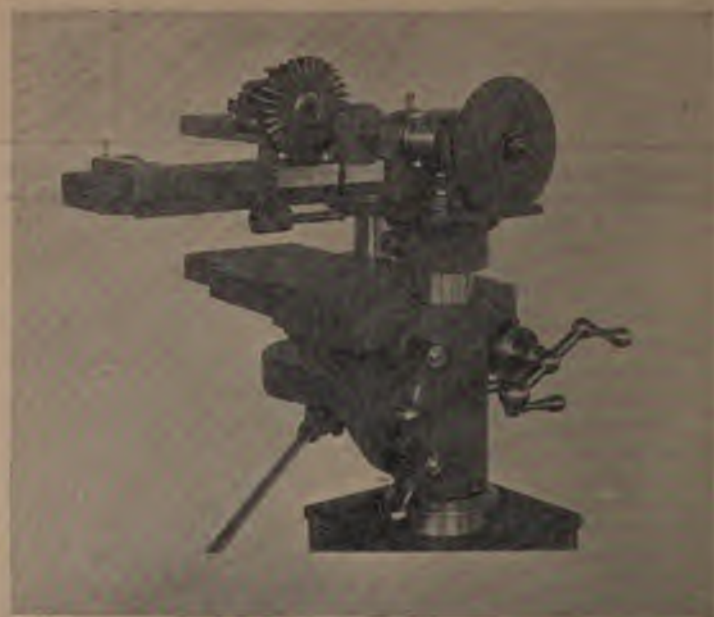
Grinding Side Teeth with Cup Wheel.
